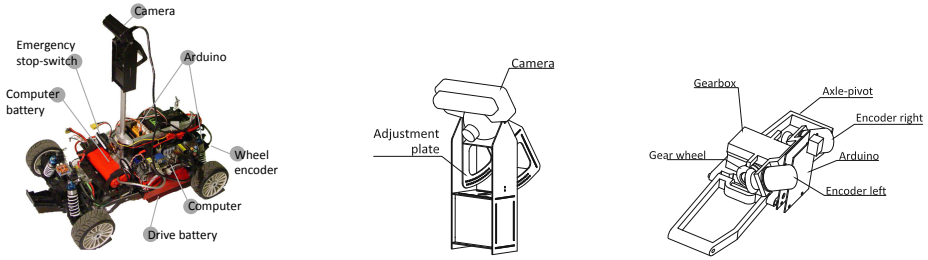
Left: Final chassis. Center: Camera mount. Right: Wheel encoder mount.
